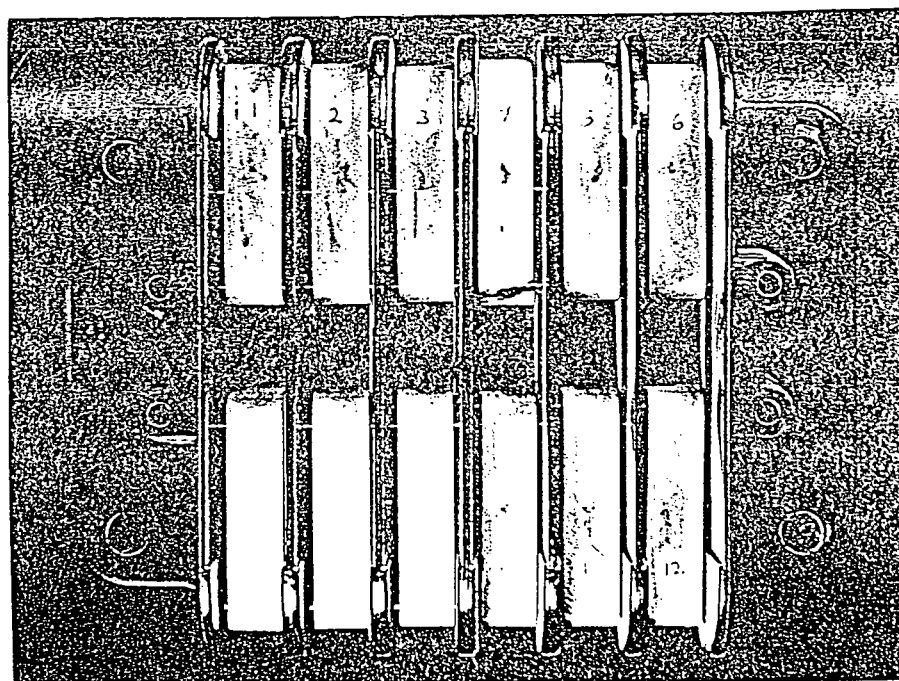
Optical photograph of the back of the 3A0605 contact block showing the fracture at finger #4.
